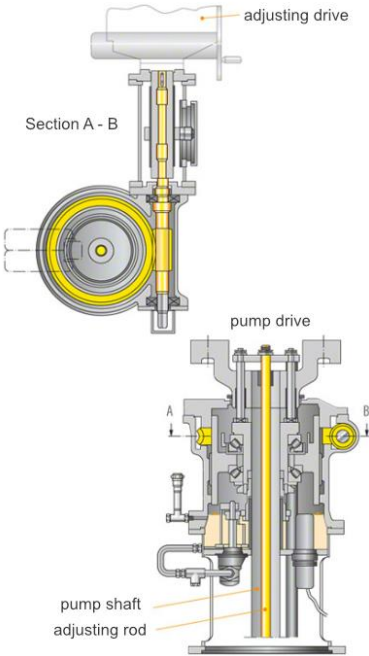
Drive options for adjusting rod (Hellmann, 2011, p. 164) – (source modified)
